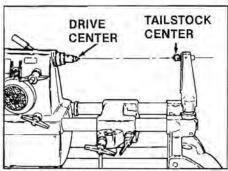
Both the drive center and tailstock center must be directly in line with each other in order to properly support a workpiece.
